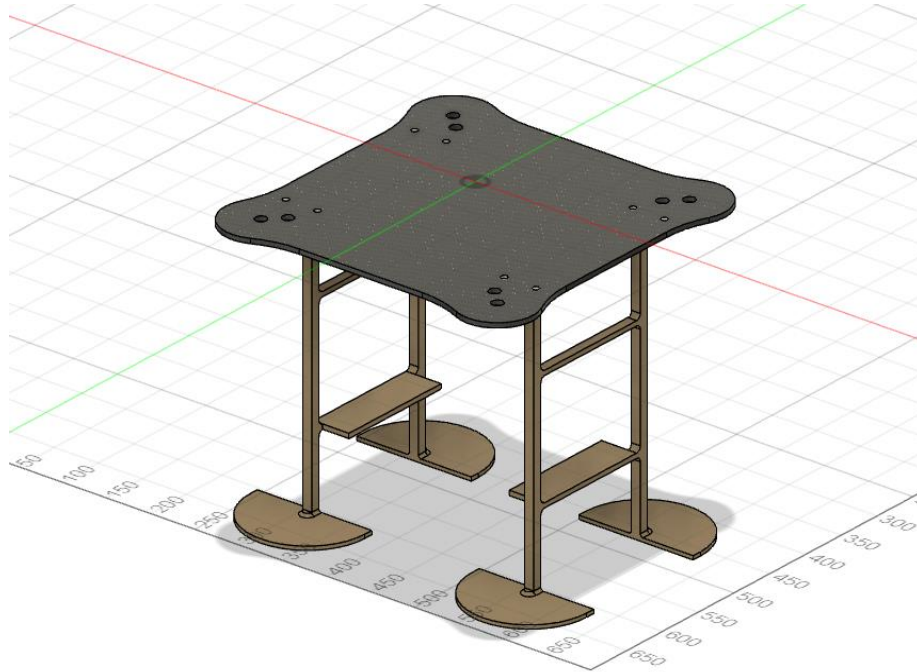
Assembly of the lower fuselage plate and the landing gear.
